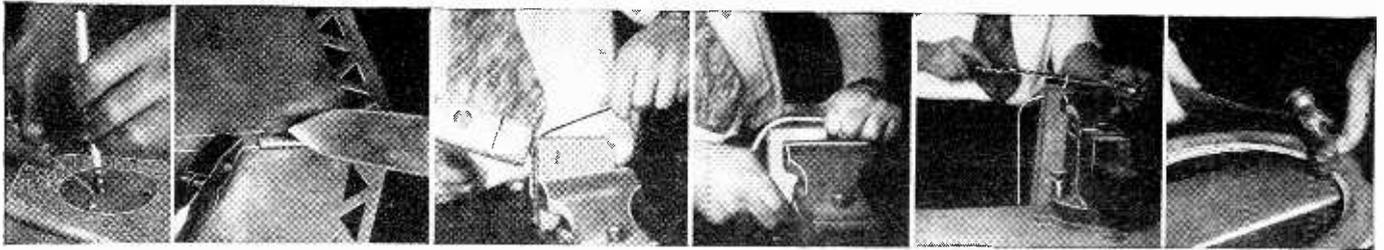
Locating jewels. Fig. 7 — Soldering clips in place. Fig. 8—Making sharp bends. Fig. 9—Bending long sweeps. Fig. 10—Sawing a shoulder. Fig. 11 — Hammering ring bevel.
